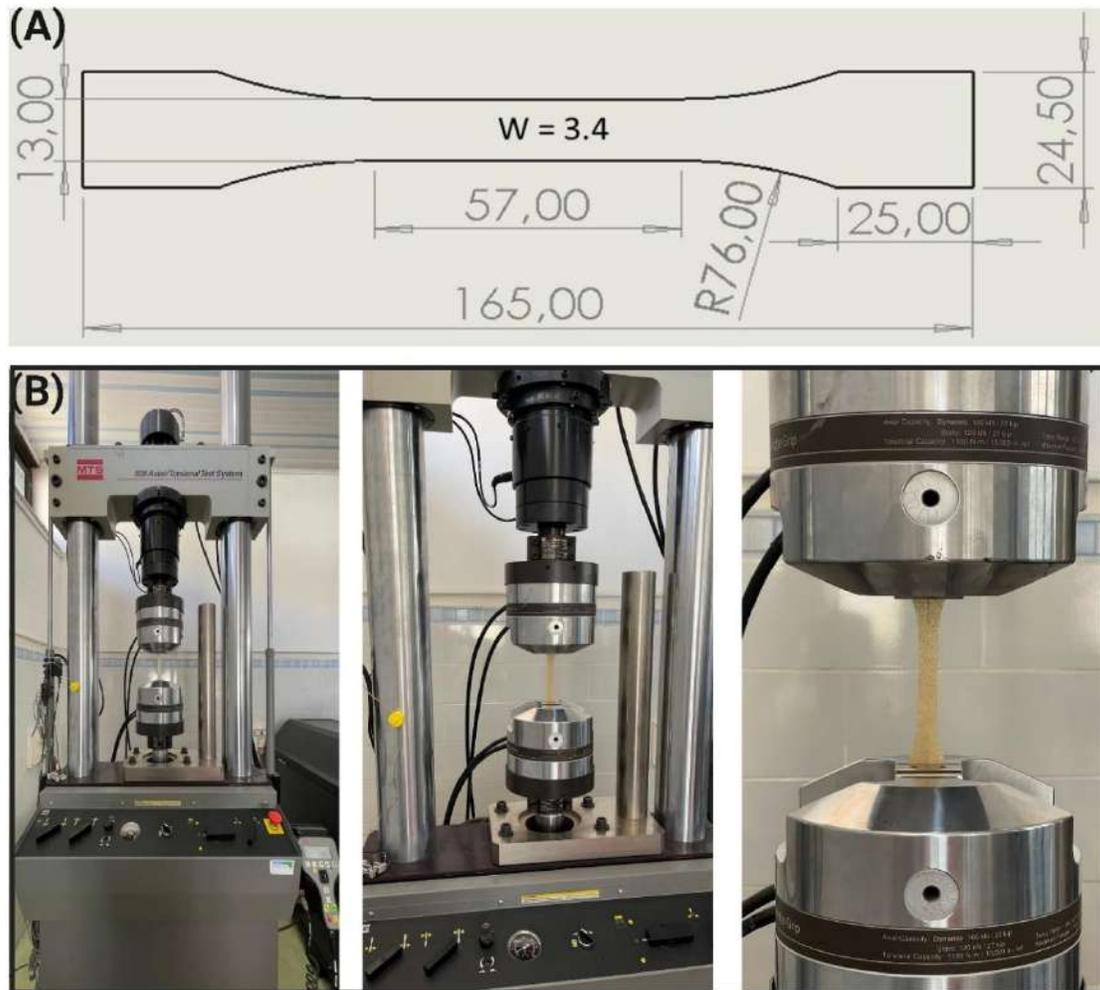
Fatigue test on 3D printed bio-composites, (A) is the test sample design, (B) is the position of the samples in the machine.
